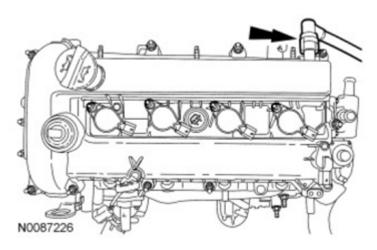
Locating Crankshaft Vent Tube Courtesy of FORD MOTOR CO.
